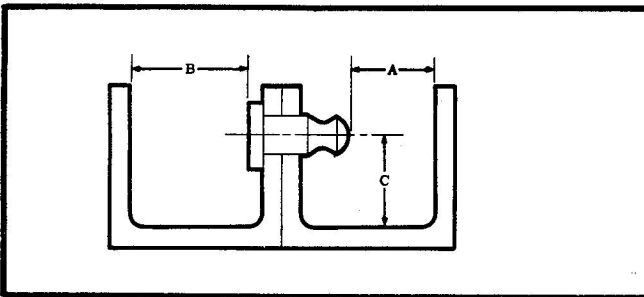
Clearances Required for Driving Hi-Shear Rivets
